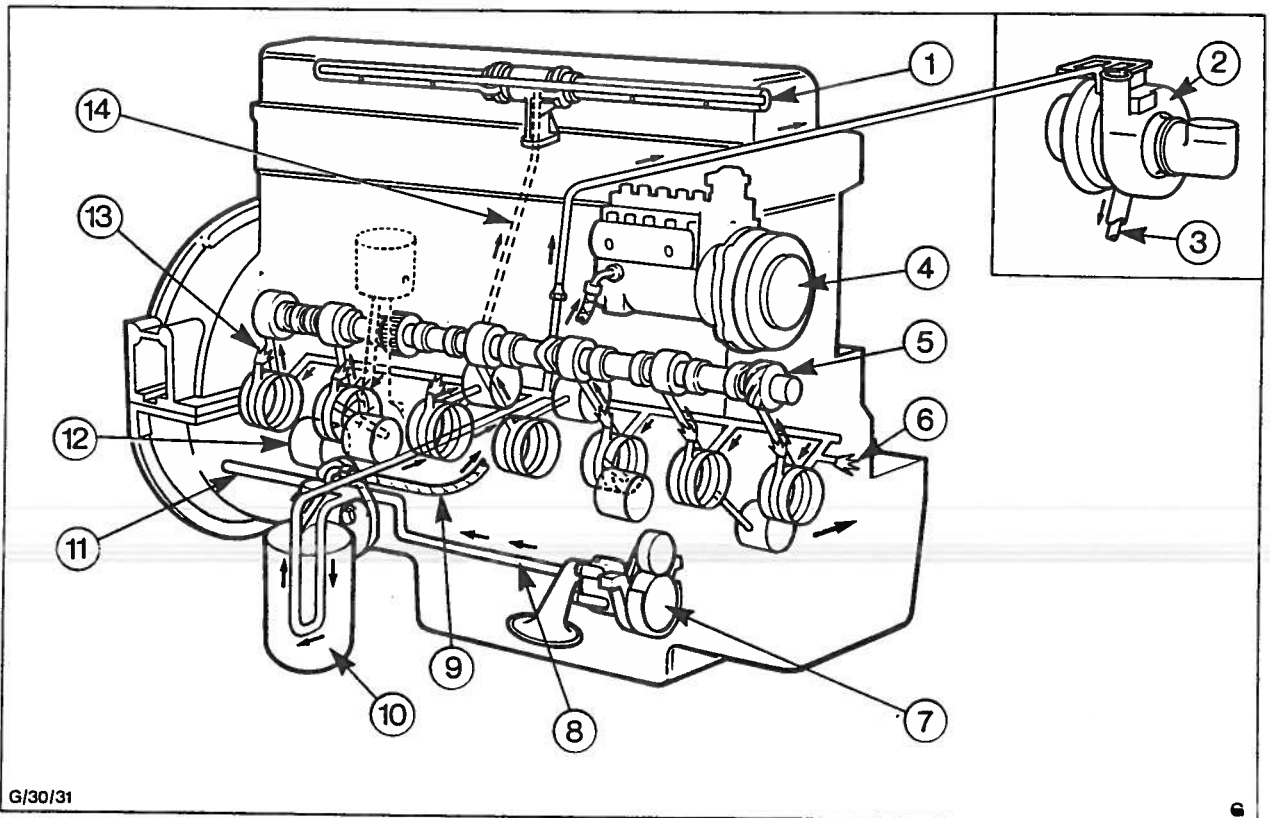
Engine Oil Lubricating Circuit (Schematic) - 2728T Engine Illustrated
